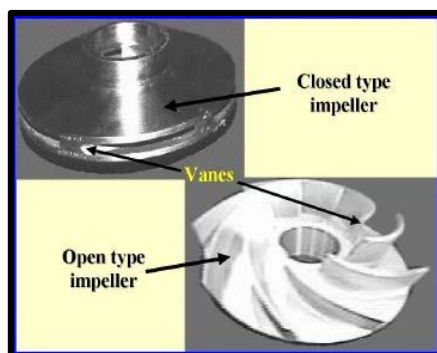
Closed and Open Impeller Types (Sahdev)
